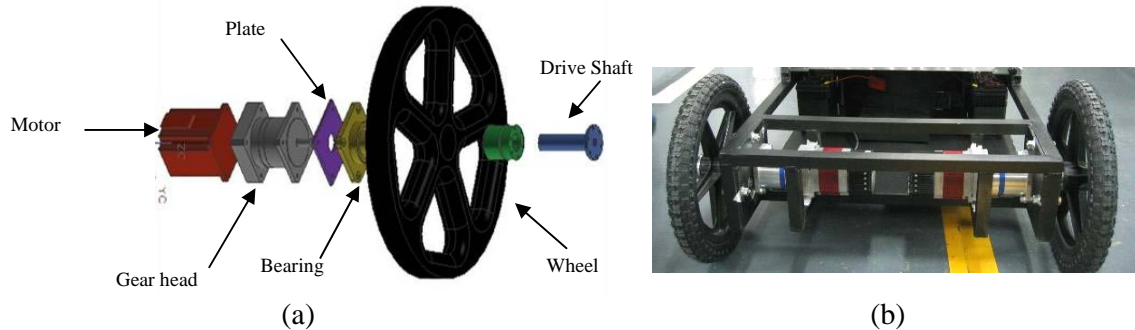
CAD model of right drive train (a) and installed drive train (b)
